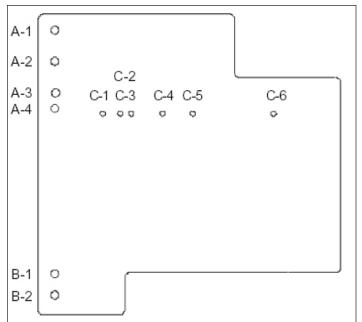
Front view of closure tool showing mounting/testing locations (6352C49H01).
